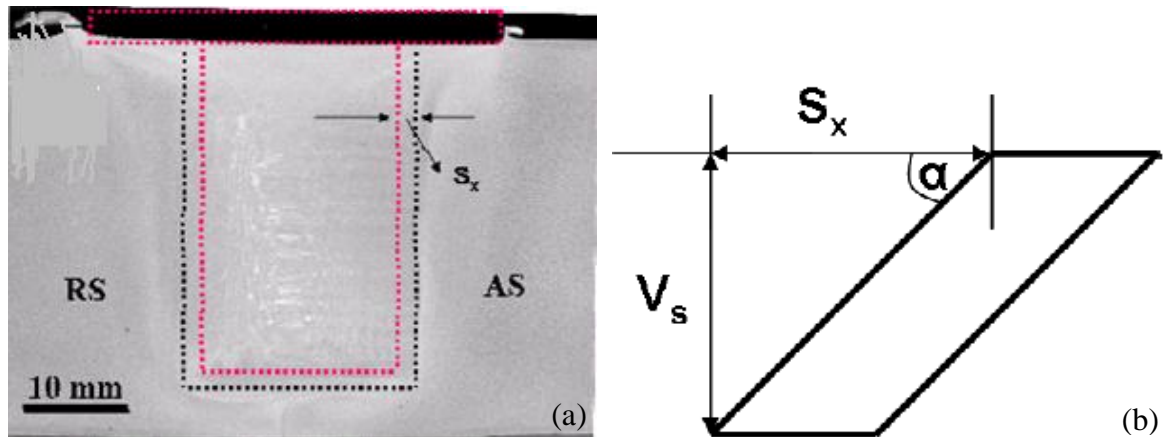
(a) A schematic of the tool shape superimposed on the optical macrograph of a FSWed aluminium alloy with a parallel probe tool. Red dashed line represents the tool dimension and black dashed line represents the nugget zone (NG); (b) Schematic of shear strain rate calculation (Ahmed, 2009)
